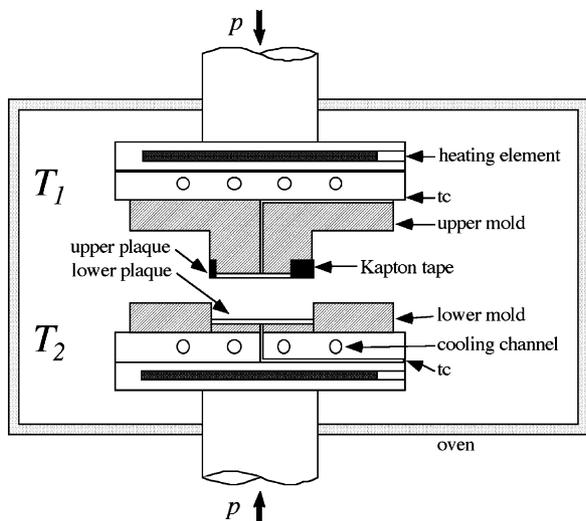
Schematic of the  $50 \times 50 \text{ mm}^2$  matched-die mould showing the heating elements, cooling channels and thermocouples (tc) located at the upper and lower mould faces.
